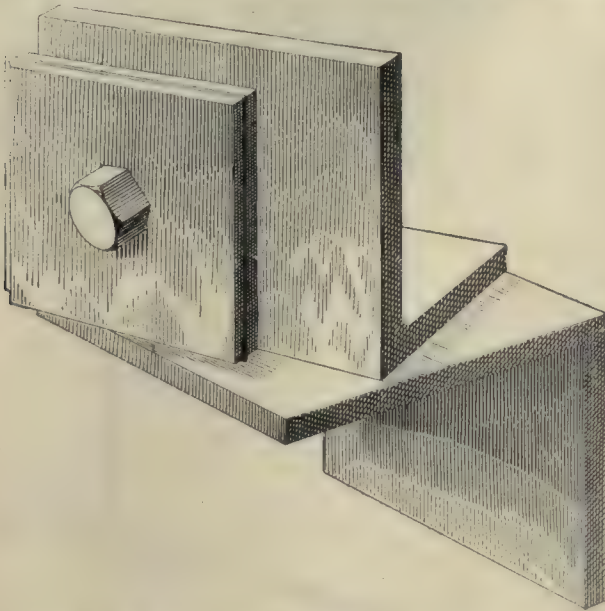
SET-UP FOR GRINDING KNIFE EDGES
